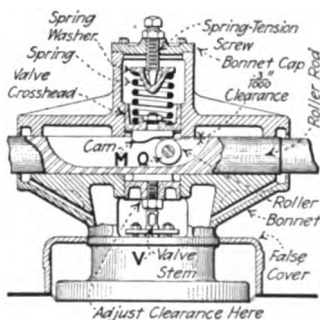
Section through bonnet and valve of Ames uniflow engine.
